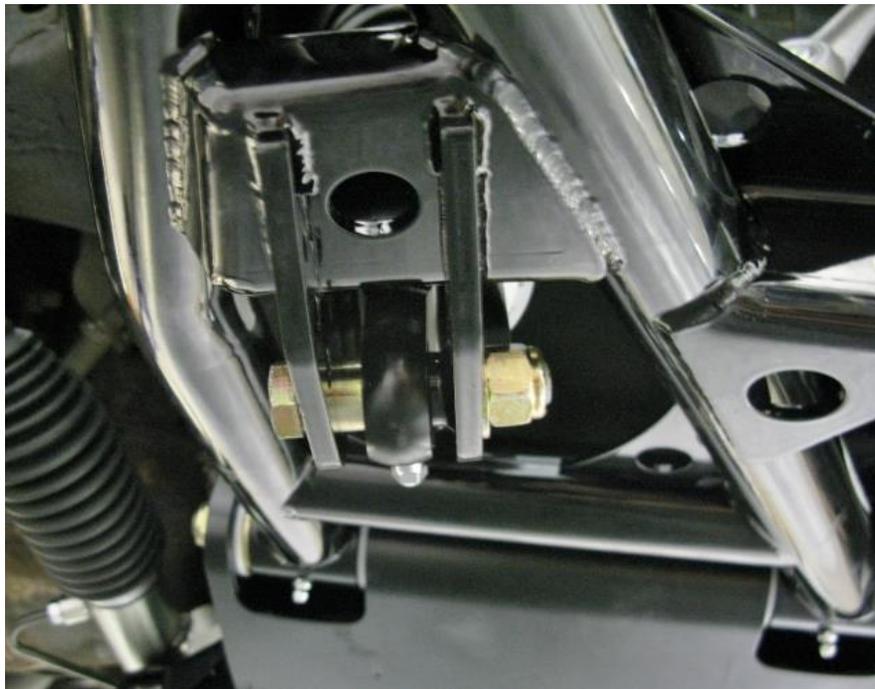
Install the Lower Shock Bolt (Passenger Side)
